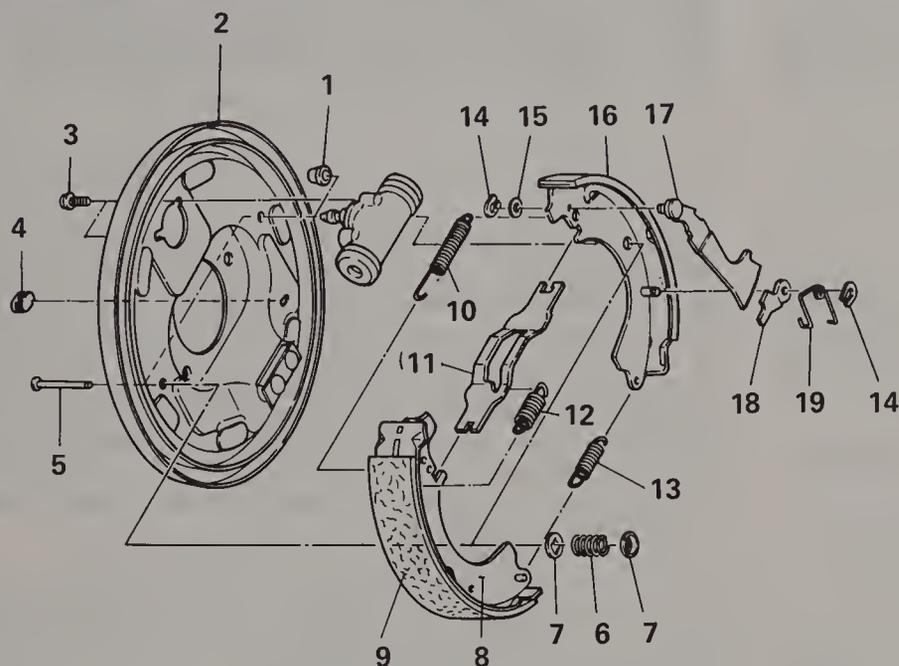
Rear brake components for MV (Pick-up) models sold in the UK and Europe (Sec 23)
